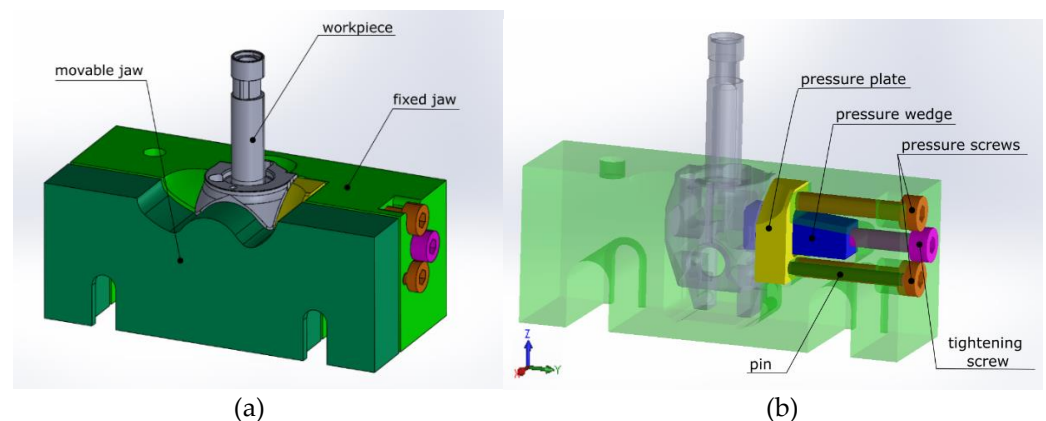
(a) The second version of the fixture for clamping workpiece on milling machine;
